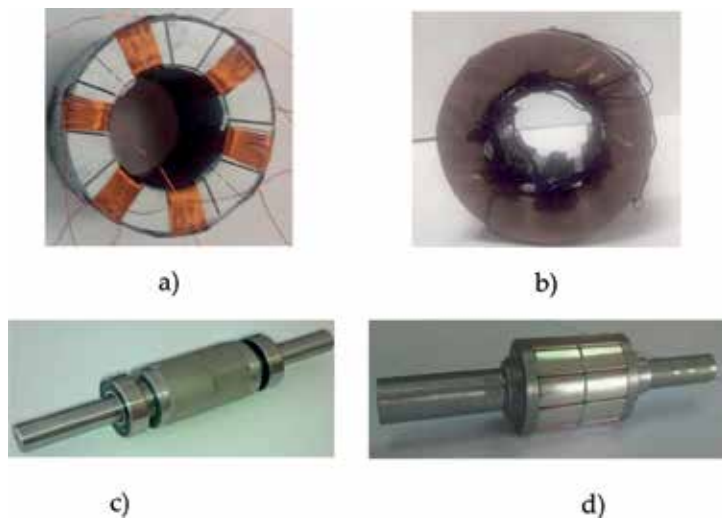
(a) The stator core with toroidal winding; (b) the stator core with concentrated winding; (c) 2-pole rotor; and (d) multi-pole rotor.
